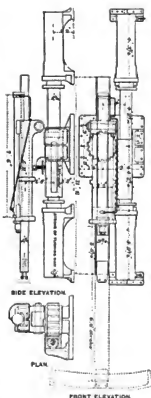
DETAILS OF HYDRAULIC ELEVATORS.
